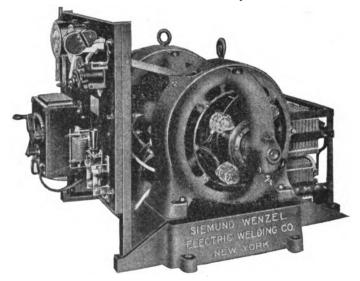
Single Welder Siemund-Wenzel Unit
